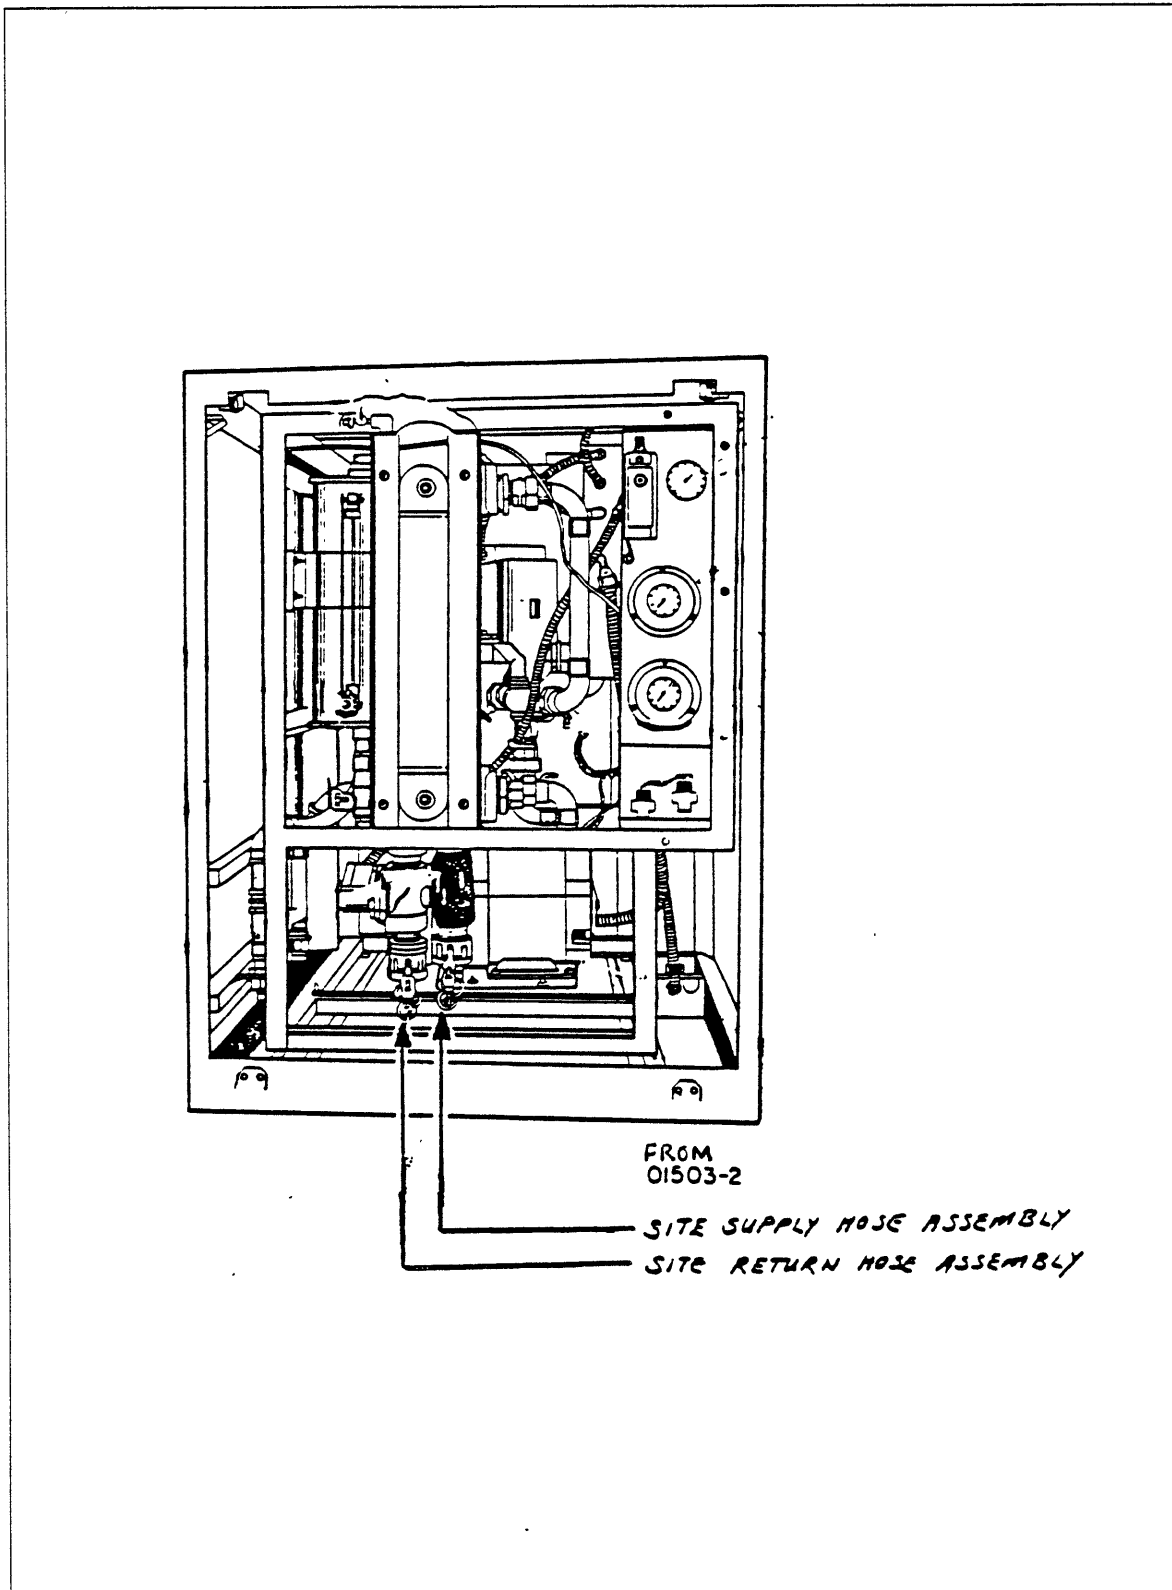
Connecting Site Water Hose Assemblies to Water Cooling Unit
